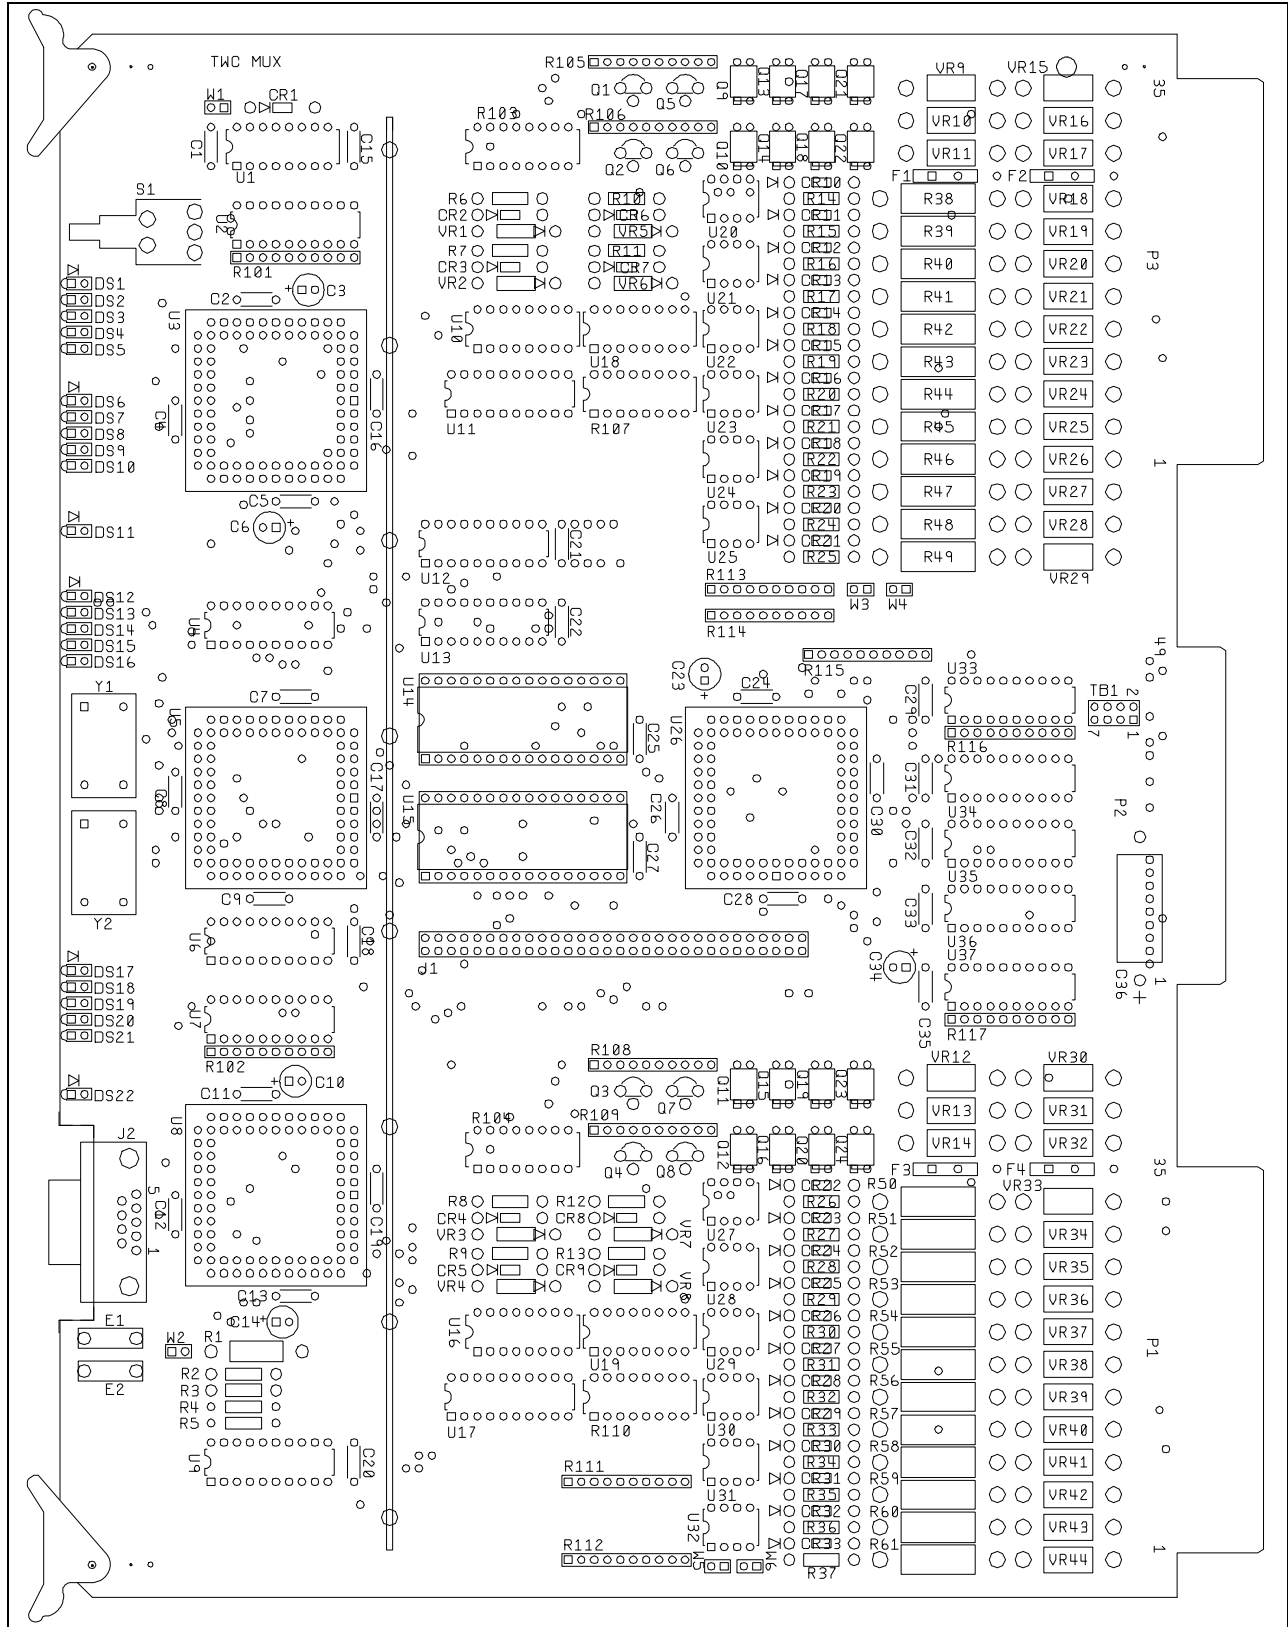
NVTWC-MUX Board, P/N 31166-100-00
